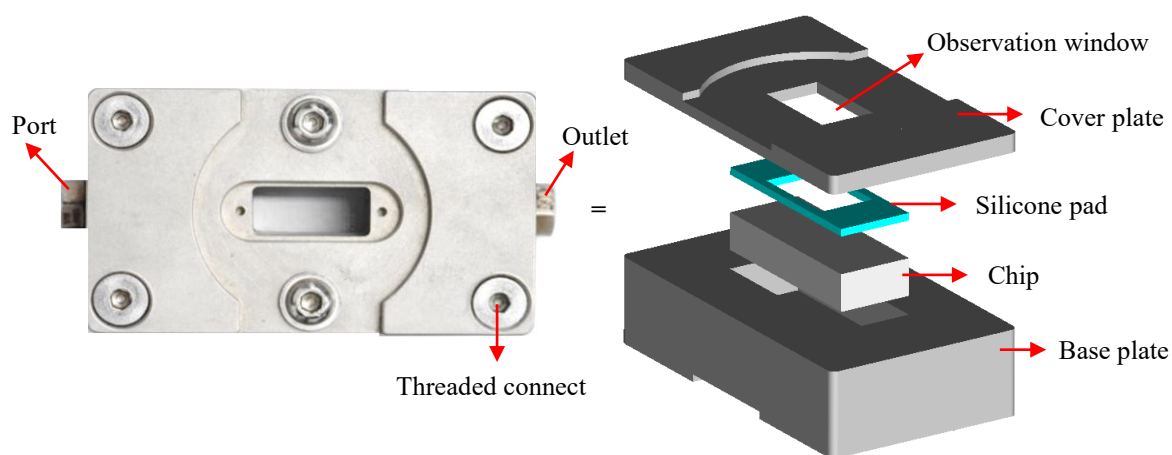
Schematic illustration of the metal fixture structure and component assembly.
